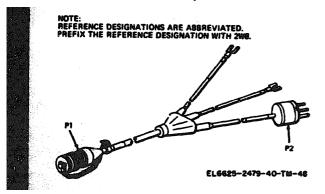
Cable Assembly, Power, Electrical, Branched CX-12724/AYM-8, parts location.
